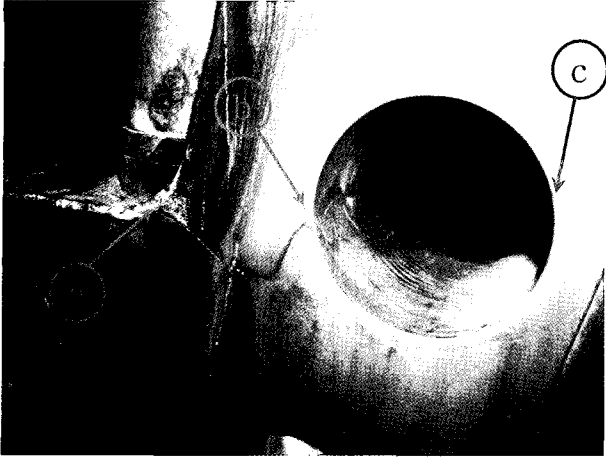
Thermo-mechanical fatigue crack of gas turbine casing
